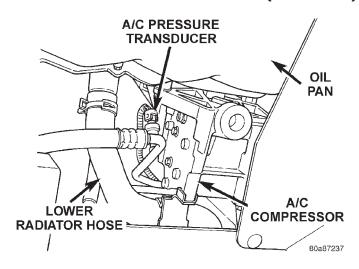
Pressure Transducer (2.4L engine, viewed from beneath vehicle)
